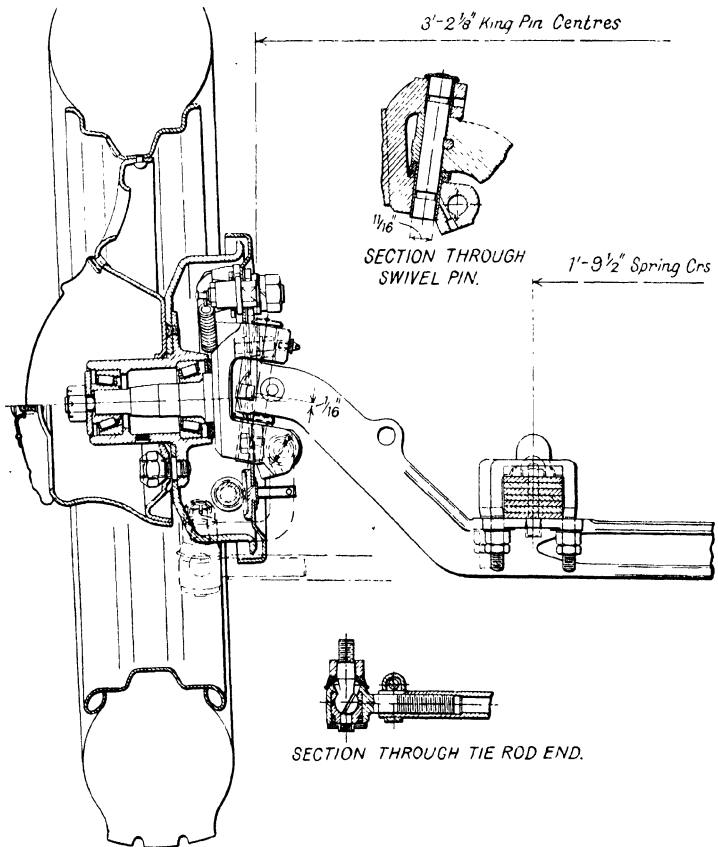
FRONT AXLE OF THE STANDARD TEN
